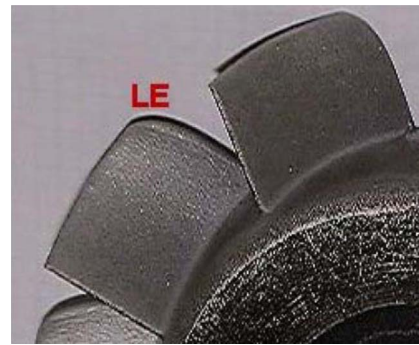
Eroded test rotor blades due to sand ingestion near design point during 9 h (Fig. 9 from Ghenaiet et al. [20])
